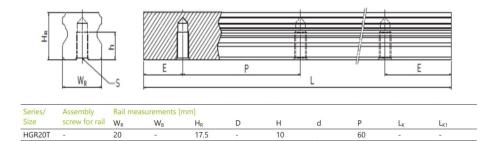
Dimensional drawing of the rail of the HGH20CA2T1400Z0H+CZS by the company HIWIN.
